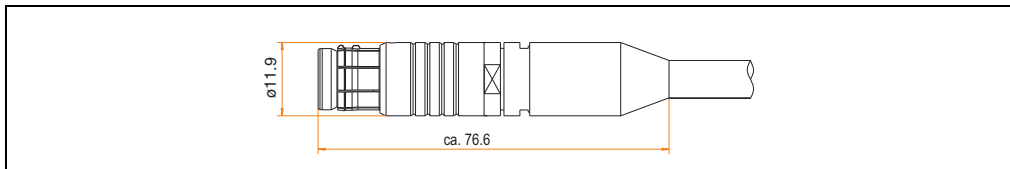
Plug dimensions (ODU Minisnap) - SDL cable 5CASDL.0xxx-30 Rev. ≥ A5
